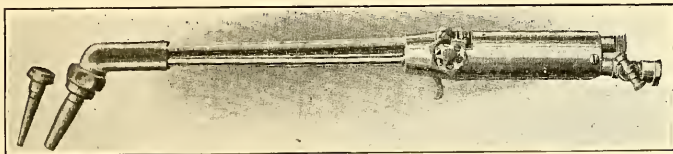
Milburn "Cut-Weld" Torch.
